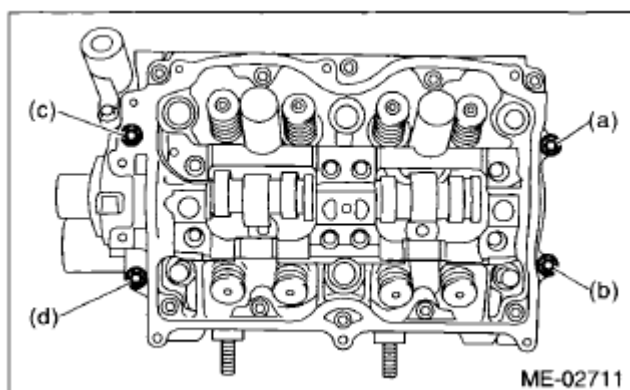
Identifying Camshaft Bolts Tighten Sequence
